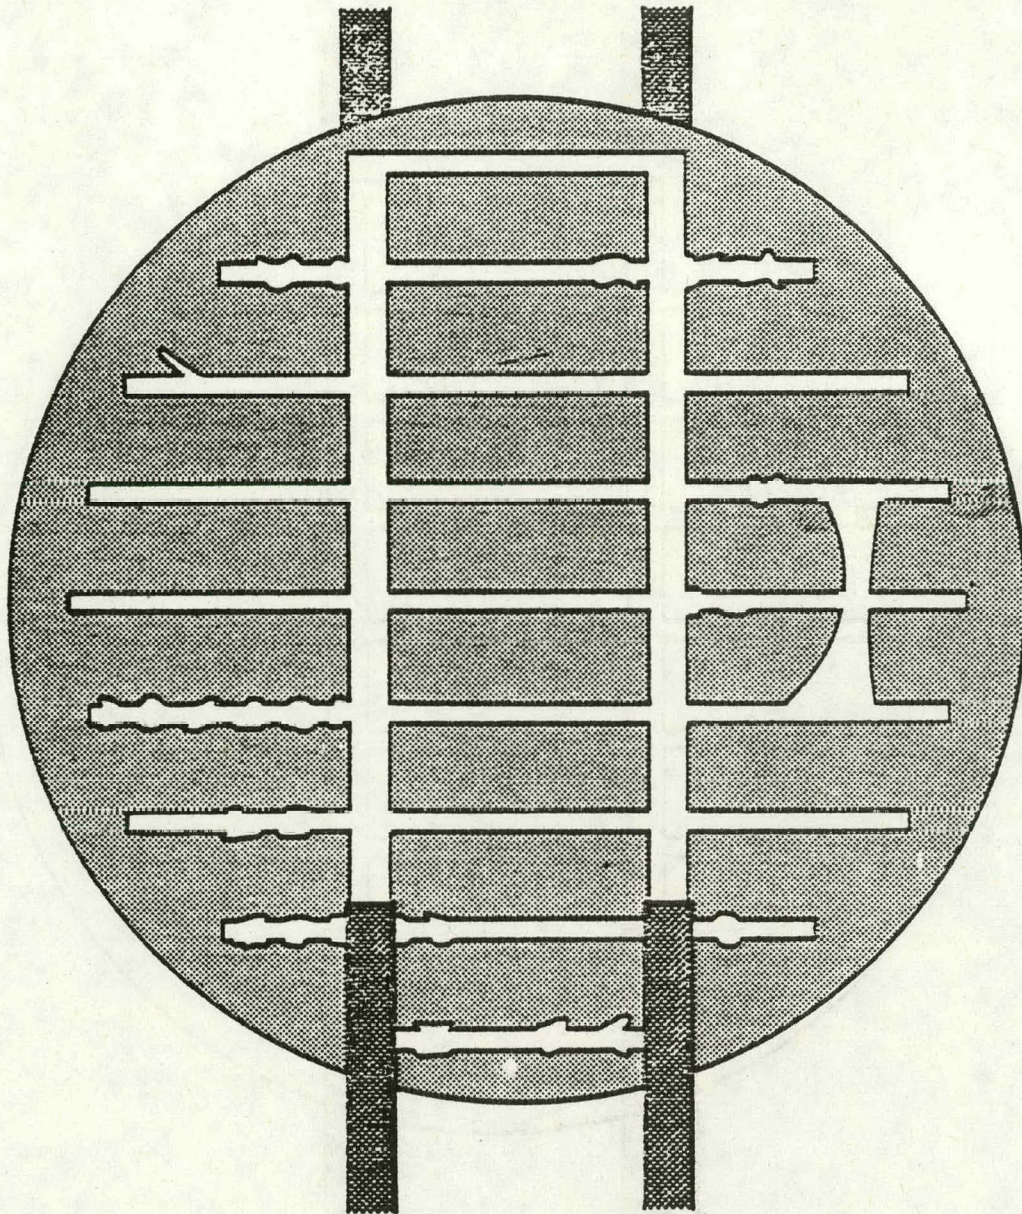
Excess Solder, and Solder Bridging Between Grid Lines.
